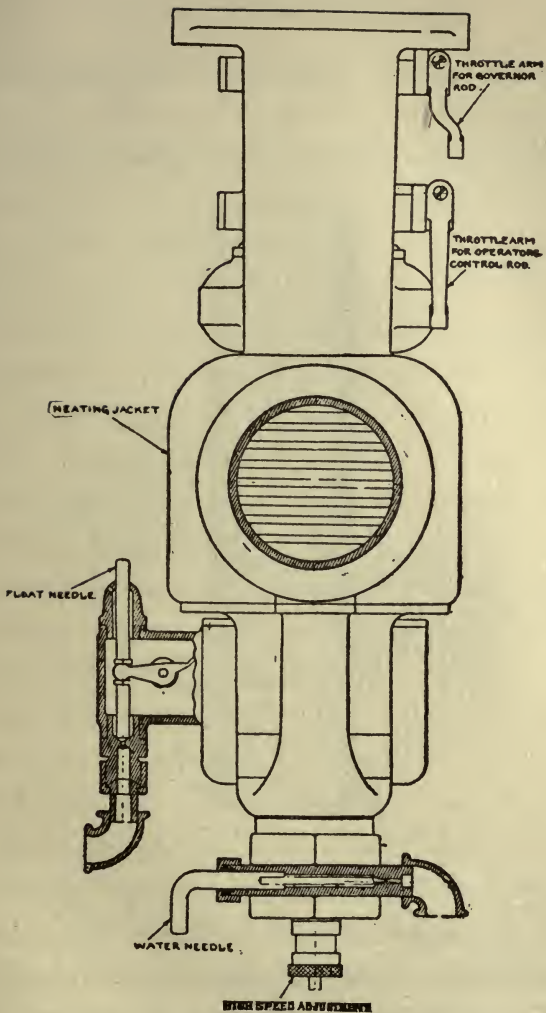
“E-B” CARBURETOR, SIDE VIEW
